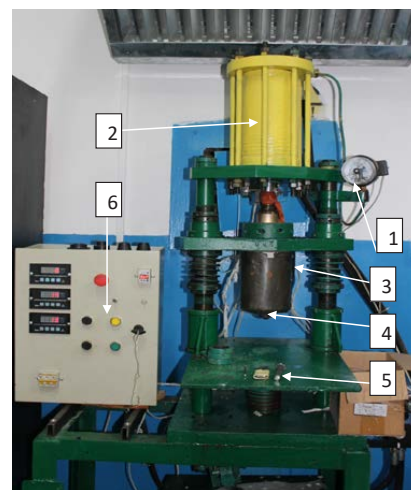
Foundry machine PL-32: 1 – manometer; 2 – hydraulic cylinder; 3 – heating chamber; 4 – nozzle; 5 – platform; 6 – remote control
